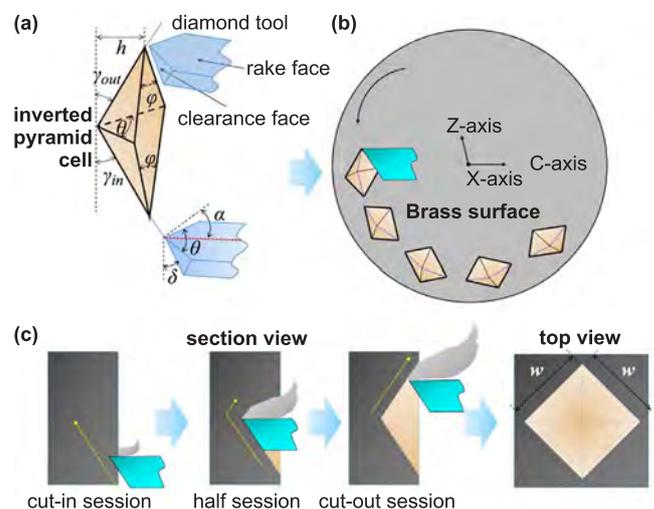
(a) Geometrical dimensions of engraved cells and the respective cutting tool, (b) Machined inverted pyramid features along the tool trajectory, (c) Motion study of micro engraving in a three-step section view. [74].
